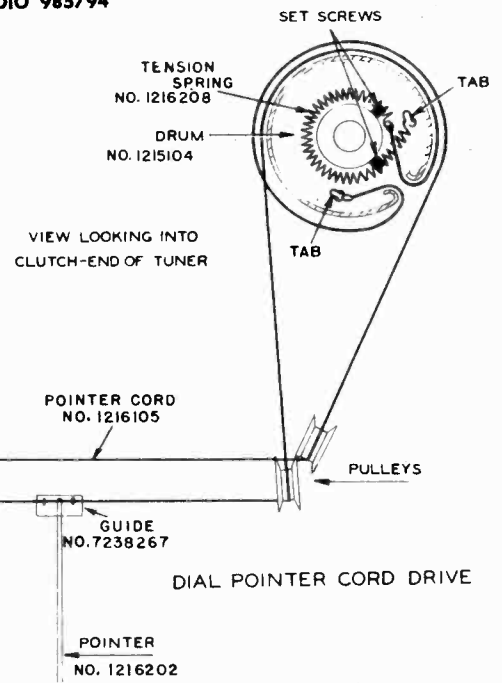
CORD DRIVE ASSEMBLIES—RADIO 985794
